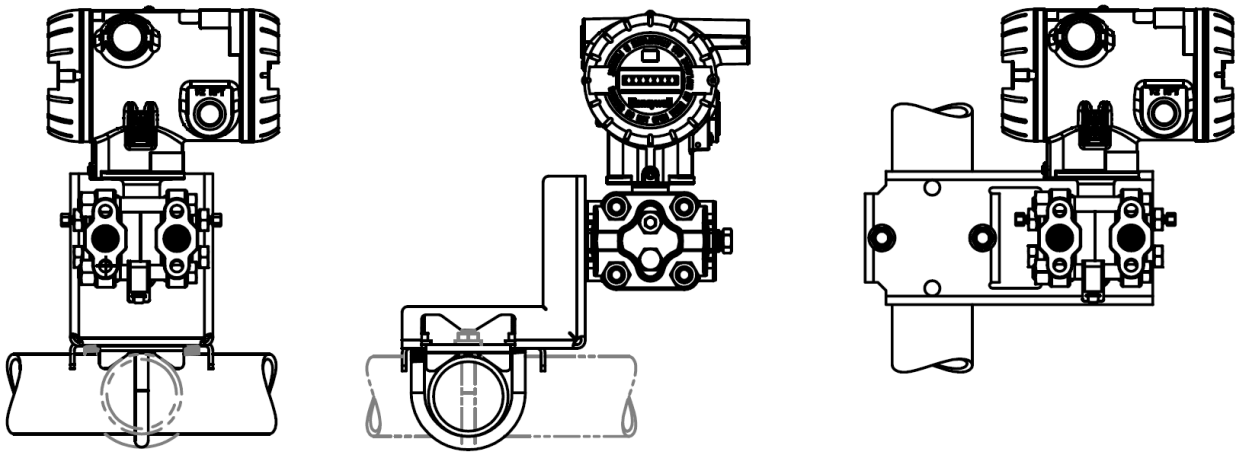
Dual Head Gauge, example of typical mounting positions (antenna omitted)
